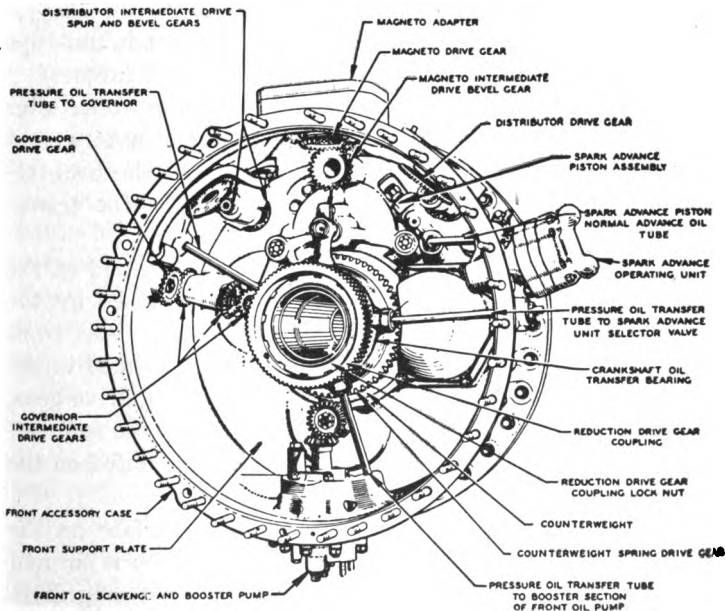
Front support plate and front accessory section assembled to crankcase section.
